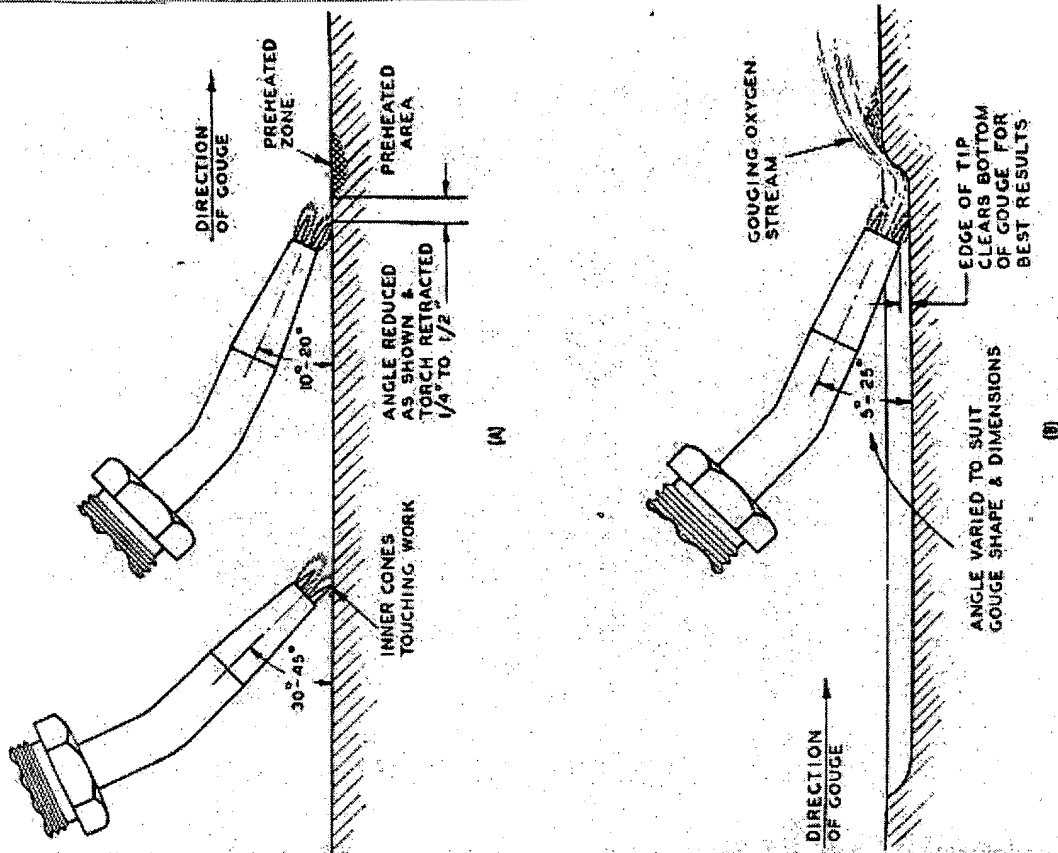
(A) Schematic showing nozzle angle for preheating (left) and for start of gouging operations (right). (B) Schematic diagram of oxygen cutting torch held at a proper angle for gouging.
